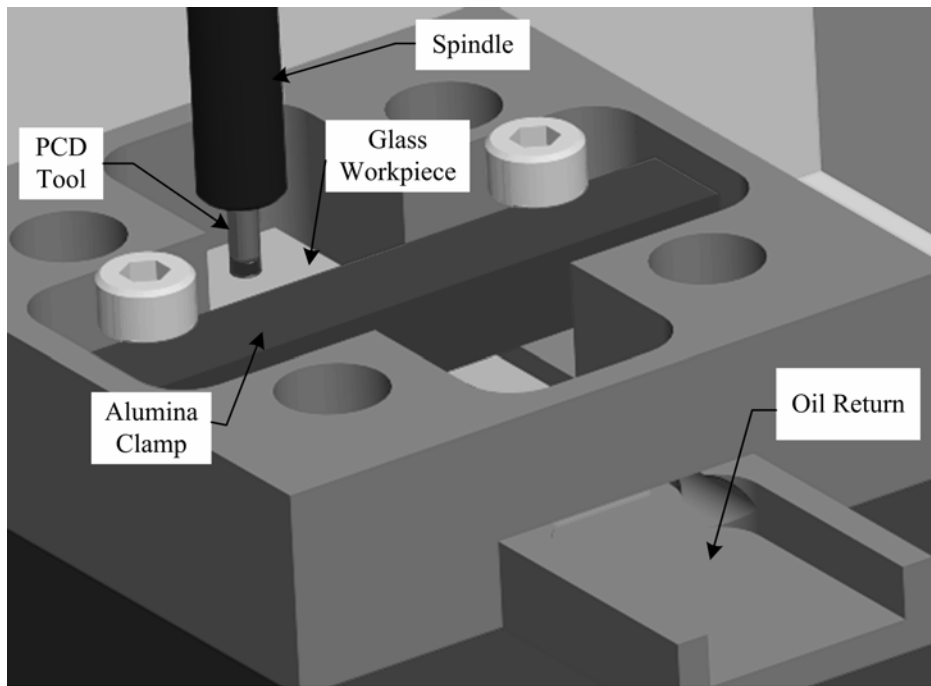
Zoomed view of the experimental setup displaying workpiece and tool.
